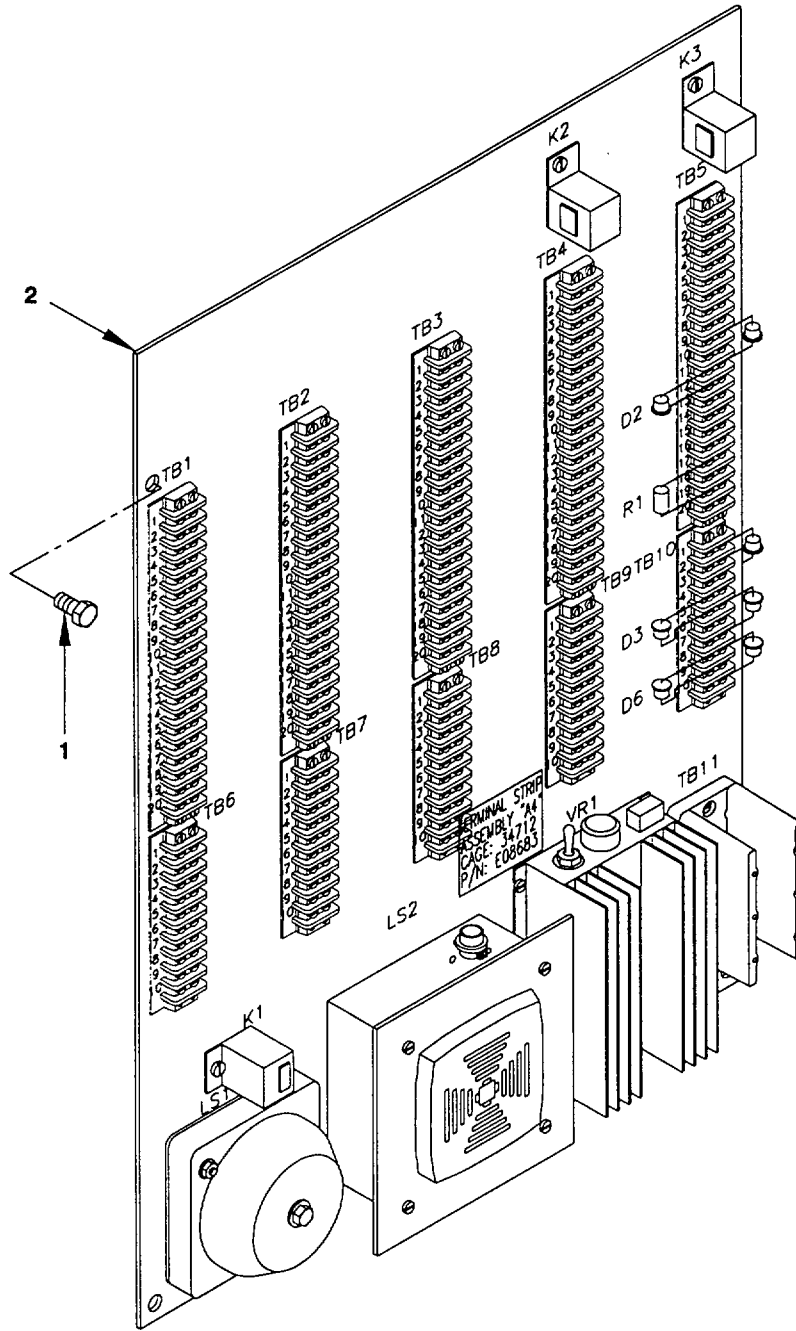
Terminal strip "A4" Assembly, Remove/Install.
